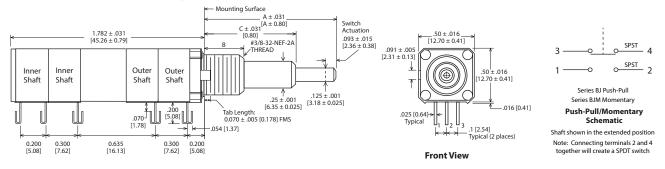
SHA22: Concentric Shafts, B22, 3 Potentiometer(s) or RS + PP, 3/8" Bushing
